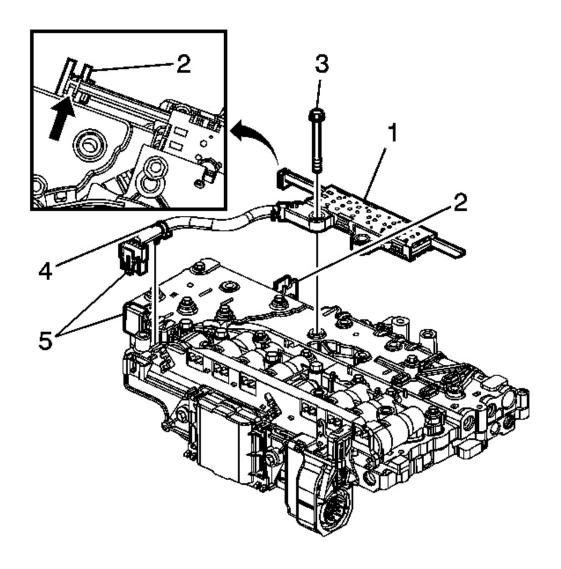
View Of Manual Shift Shaft Position Switch Assembly Courtesy of GENERAL MOTORS CORP.
